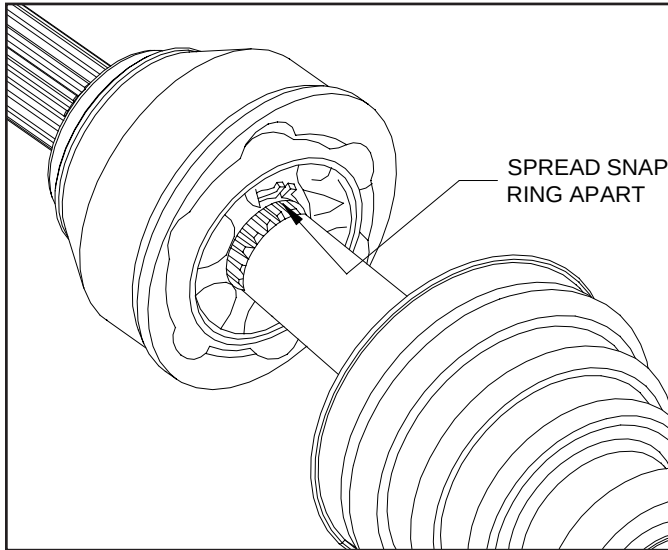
Release spindle end of half shaft by spreading snap ring
